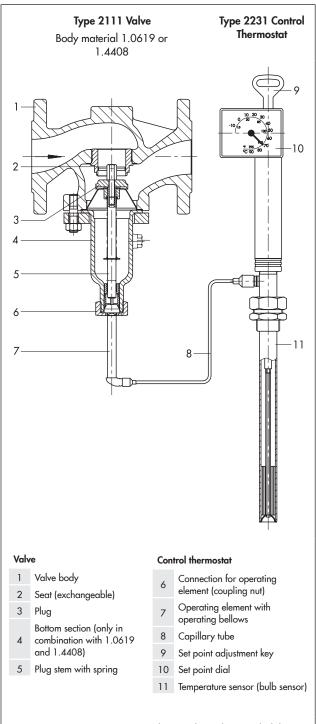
Type 1 Temperature Regulator with single-seated globe valve DN 50, valve body material 1.0619 or 1.4408 and Type 2231 Control Thermostat
